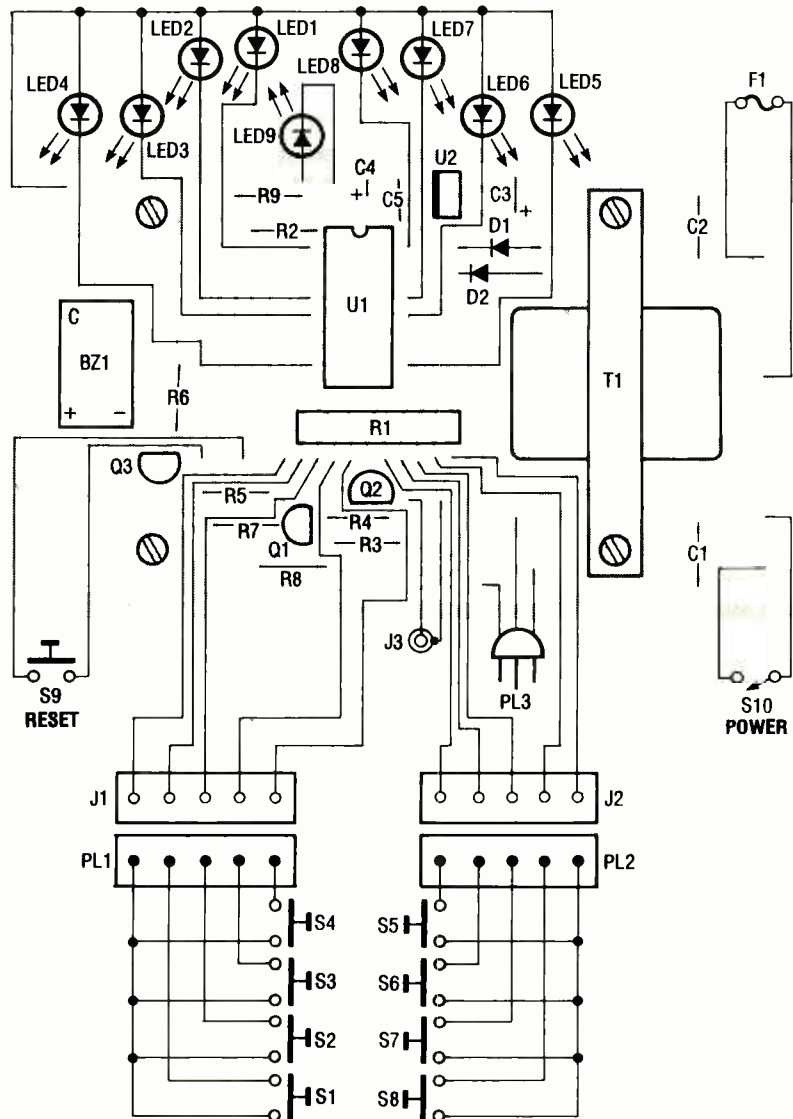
In this parts-placement diagram for the printed-circuit board, note that the power transformer (T1) and the buzzer (BZ1) are mounted directly to the board. That means that due to physical space tolerances, the vendor-referenced components specified in the Parts List are required.
